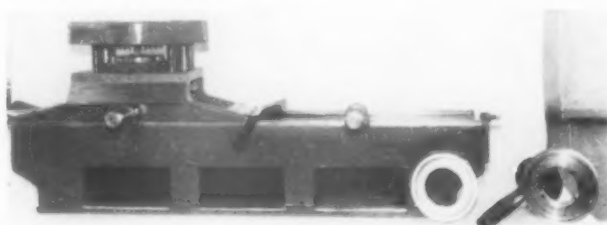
, left above, the Swartz fixture lock. FIG. 5, right above, Swartz pump jig with upper and lower pilots. FIG. 6, below, Swartz fixture for lateral indexing, to drill and ream under 2-spindle drill press provided with multi-drill heads. Photos by courtesy of Swartz Tool Products Company, 13330 Foley St., Detroit.
